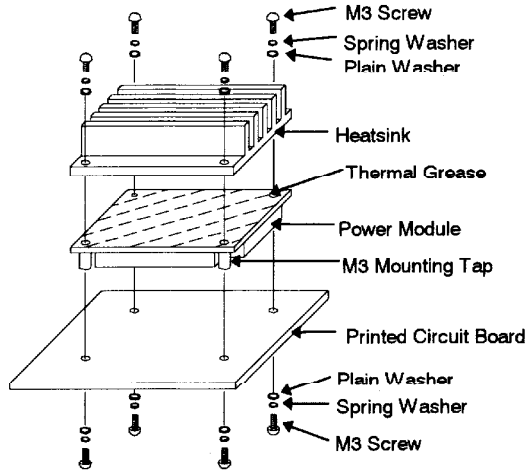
Installation of Printed Circuit Board and Heatsink
